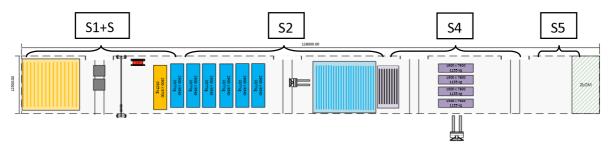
The arrangement of the steel sheets in the store – variant 3
